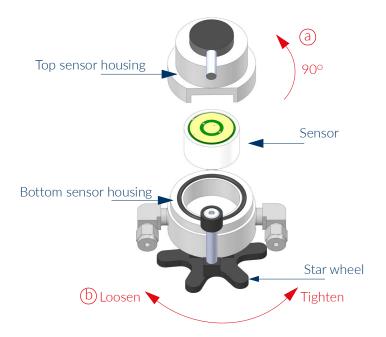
Installing and uninstalling your sensor (GPR-1100 and GPR-1200)
